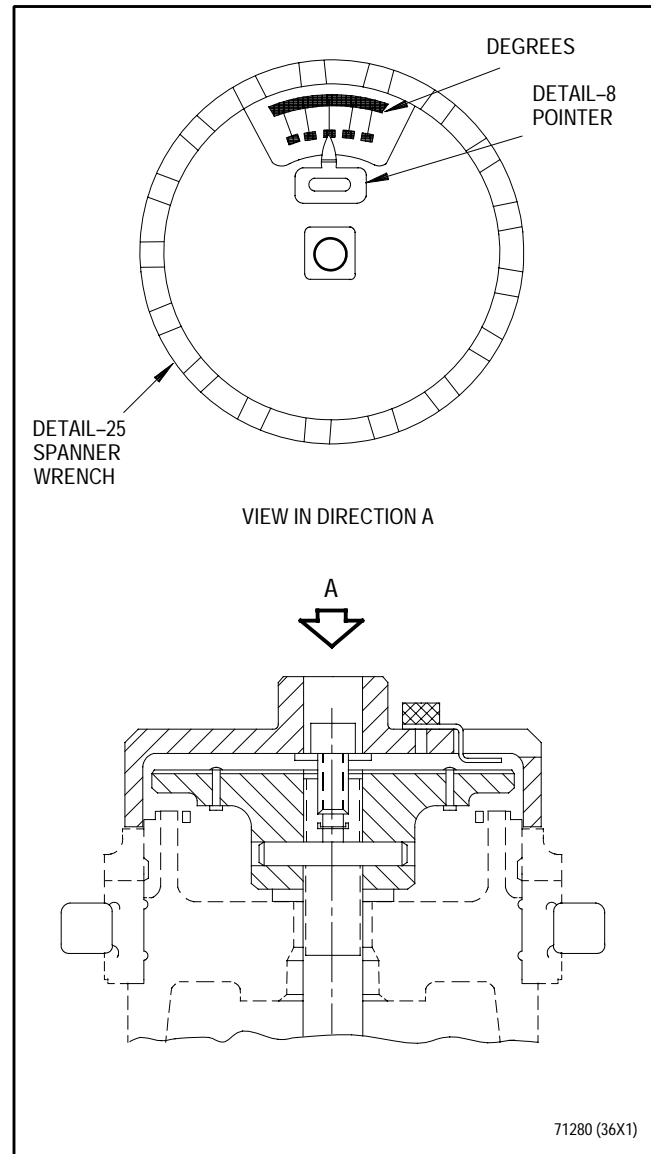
No. 5 Bearing Inner Support Assembly and No. 5 Bearing Inner Race and Rollers - Assembly (Sheet 4 of 6)
